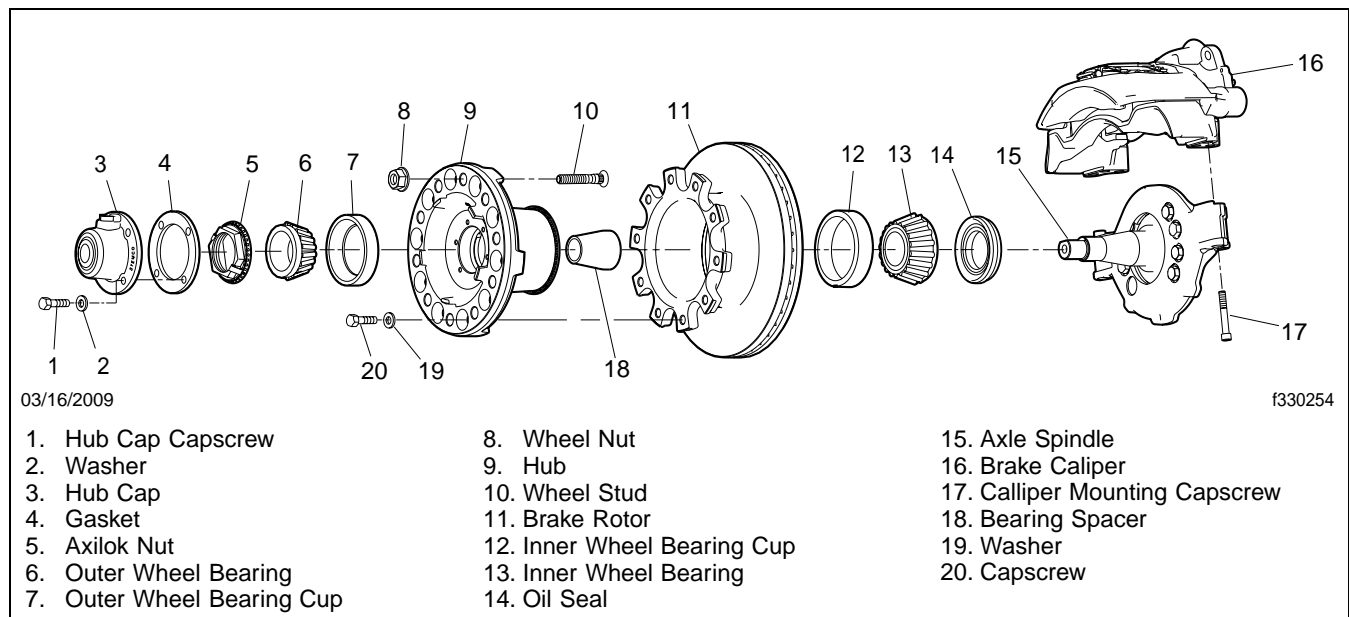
, Typical Wheel End Assembly, Front Axle with Disc Brakes
